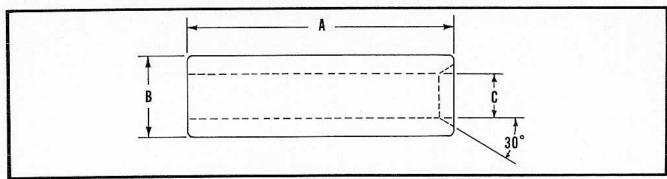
DIMENSIONAL DIAGRAM -- SEAL DRIVER
